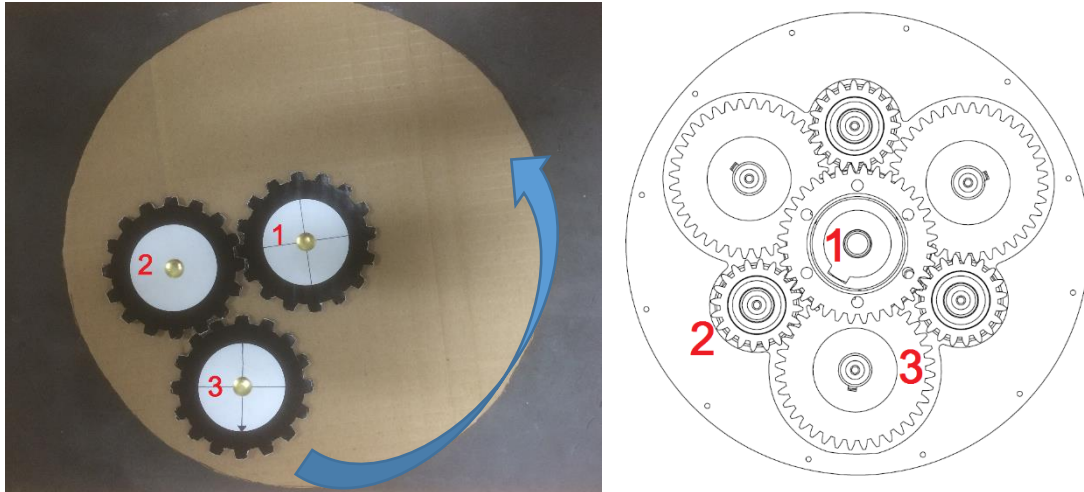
Cardboard model of the non-rotating orbital tool to explain its operating principle (left) and CAD design for the non-rotating tool (right).
